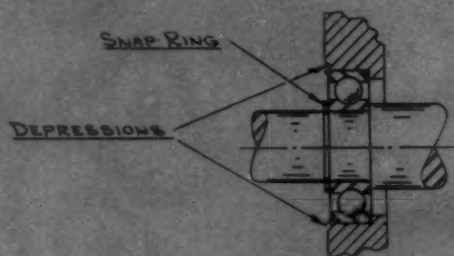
Retention of bearing in housing is accomplished by point or roller staking. Special tools cause housing metal to flow over chamfered edge of outer race.
